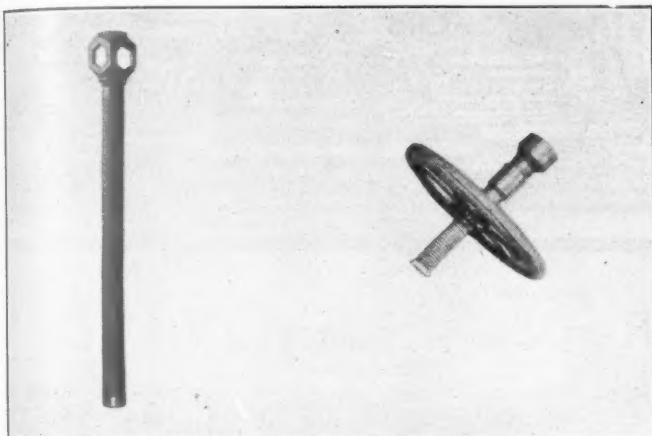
Compact Multiple Wrench Design—High-Speed Socket Wrench
